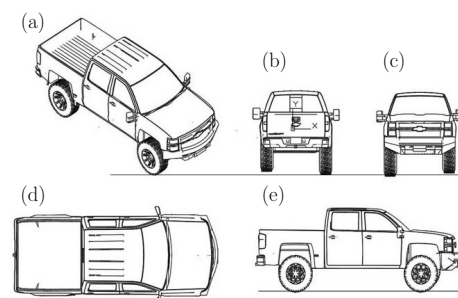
Perspective (a), rear (b), front (c), top (d), and lateral (e) views of a truck draw [Fre24].
